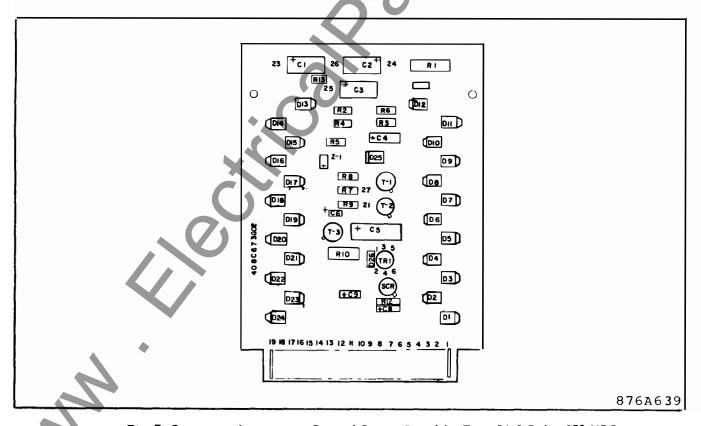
Component Location on Printed Circuit Board for Type SA-1 Relay 250 VDC
